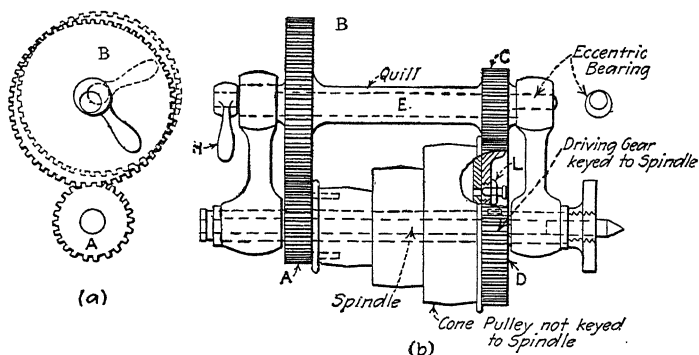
Lathe headstock. In the cut (b) shows a view looking down on the headstock with the back gears supported back of the cone pulley; (a) is an end view and shows the two positions of the back gears and back-gear handle, heavy line "in" light line "out."
